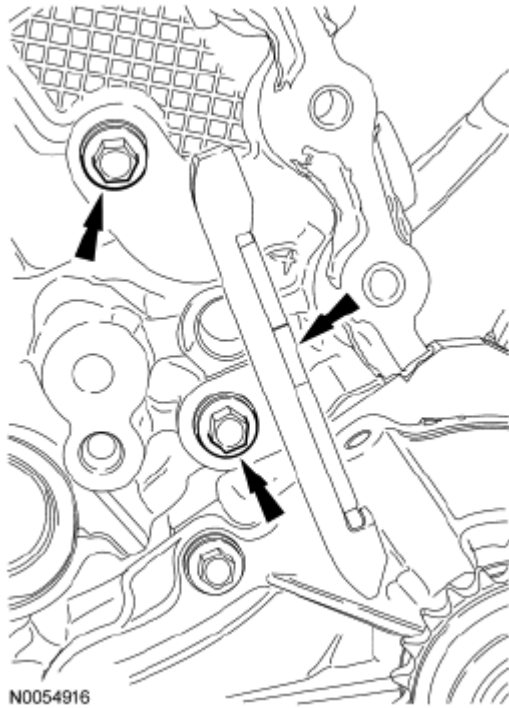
Locating RH Primary Timing Chain Guide Bolts
